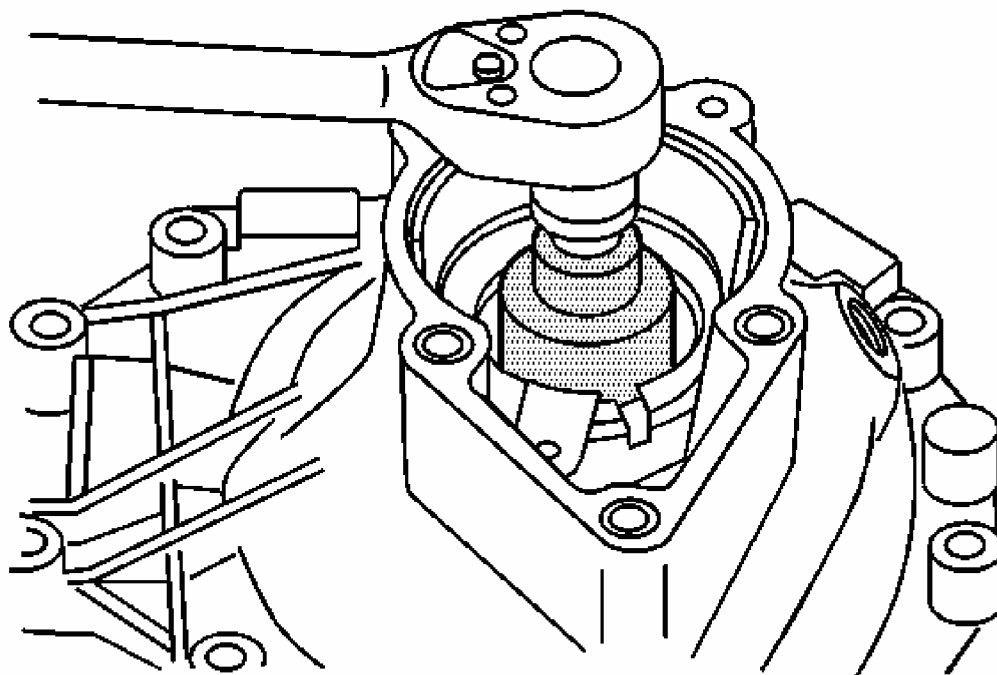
Removing & Installing Right Differential Bearing Adjuster & Differential Case Bearing Cup
